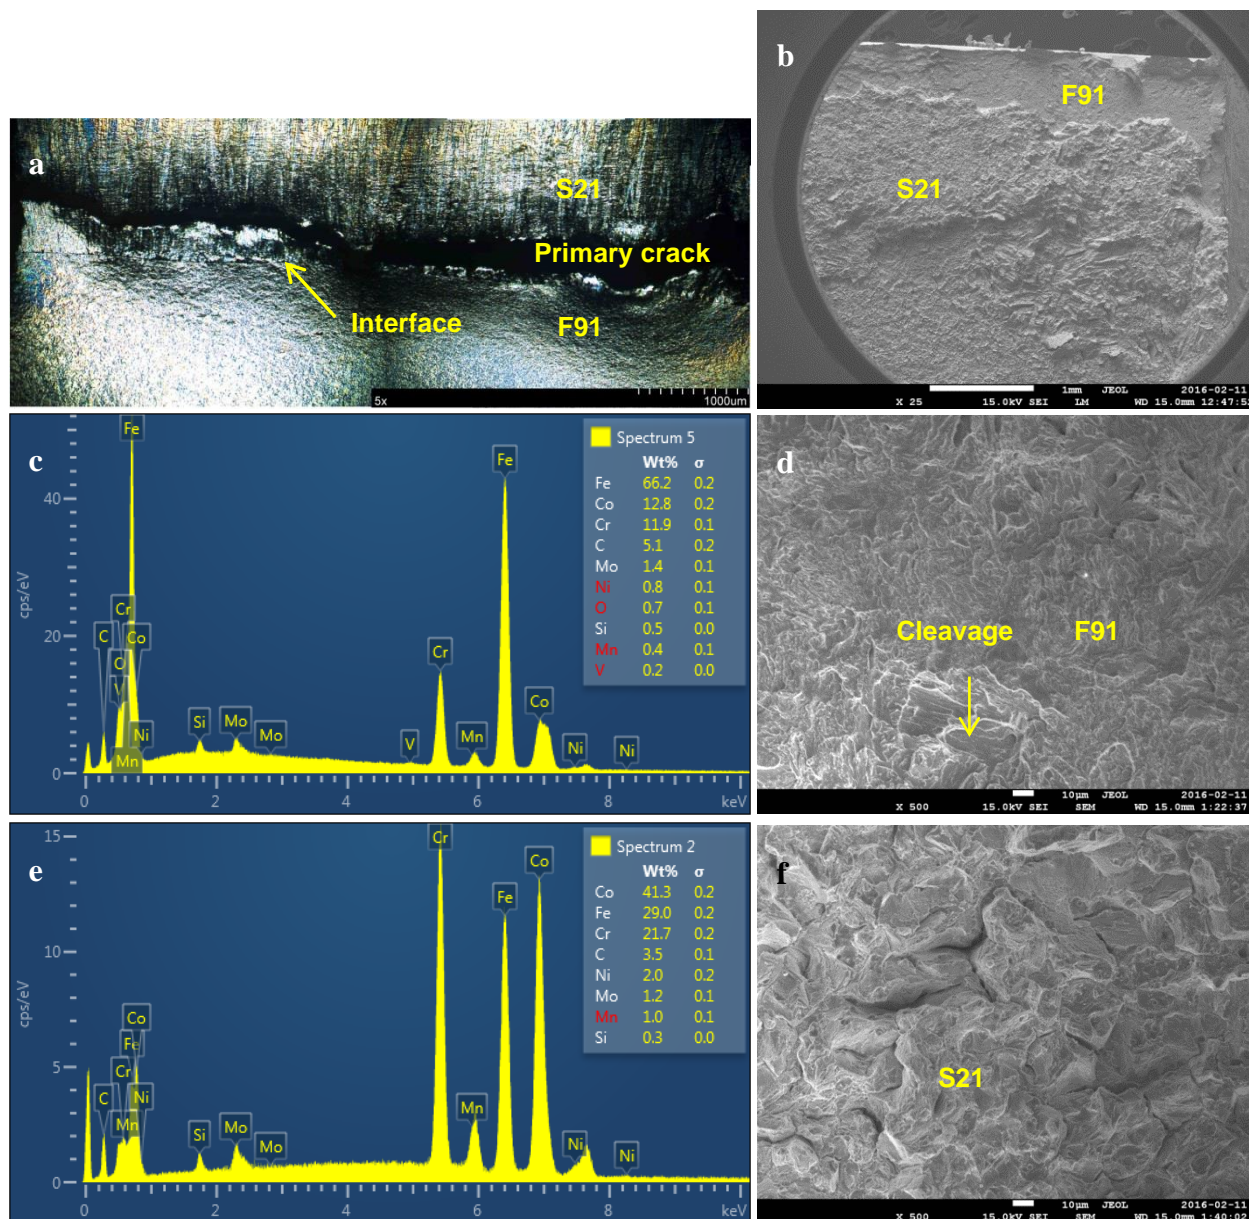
A fractured S21 specimen in the as-tempered condition: (a) cross-section, (b) macro-fractograph, (c) EDS spot measurement on the F91 region, (d) fractograph showing cleavage in the F91, (e) EDS spot measurement on the S21 region, (f) fractograph showing the interdendritic cracks.
